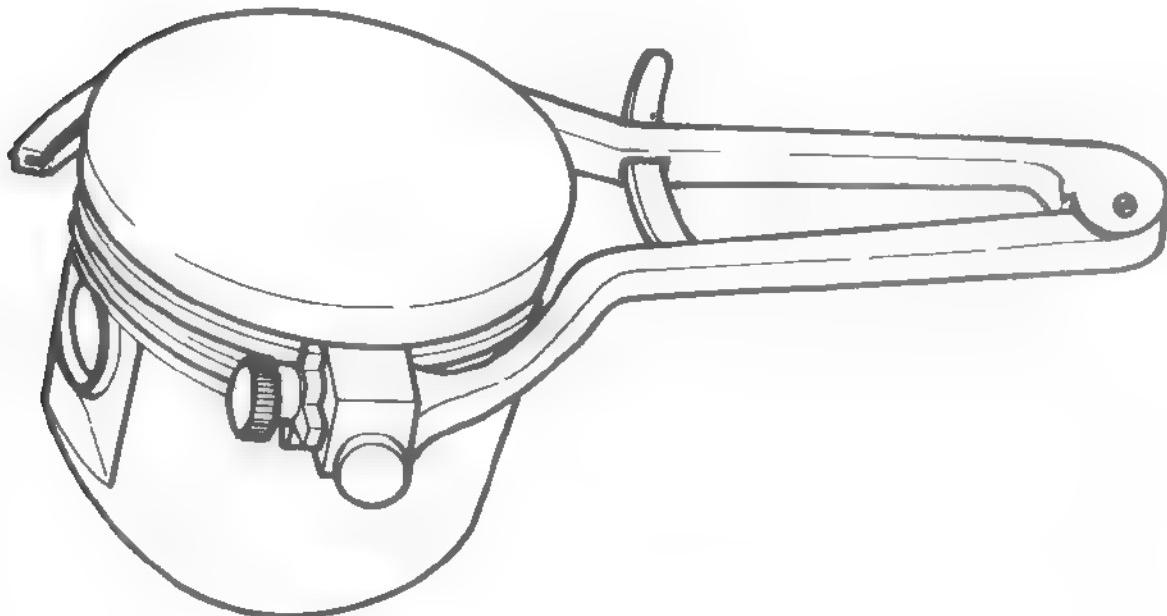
REMOVING CARBON DEPOSIT FROM PISTON RING GROOVES BY MEANS OF S-9 DEVICE;
